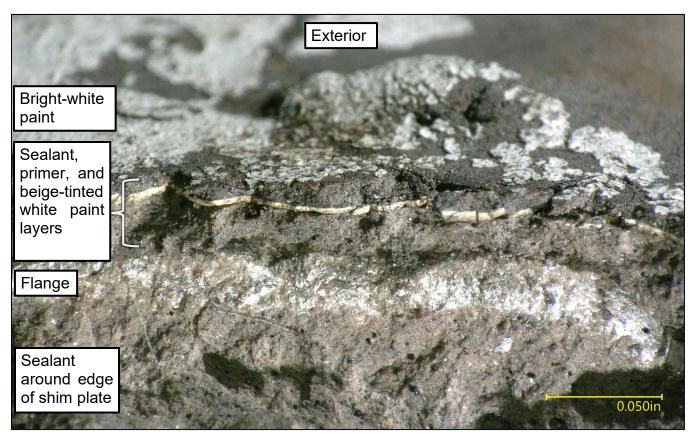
Edge of the input quill sleeve mounting flange showing sealant, primer, and paint layers on the side of the flange that mated to the tail rotor 90° gearbox.
